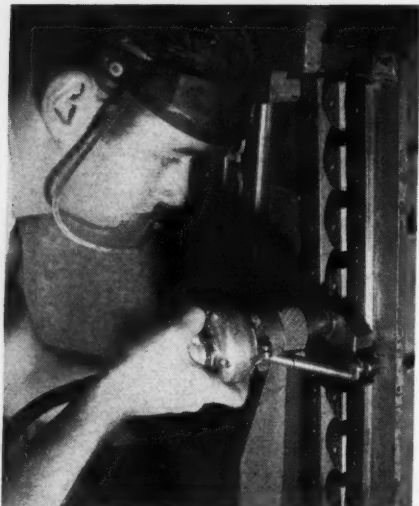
Facing the Surface of a P-38 Bomber Wing Fitting, Using an Air-Operated Portable High Speed Milling Tool
